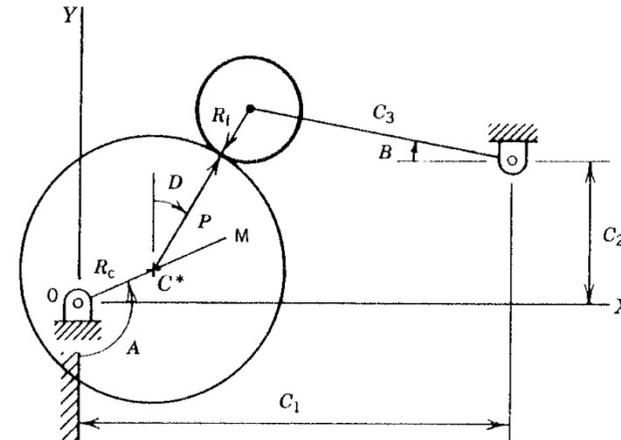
Full Circle Eccentric Cam with Pivoted, Roller Follower
